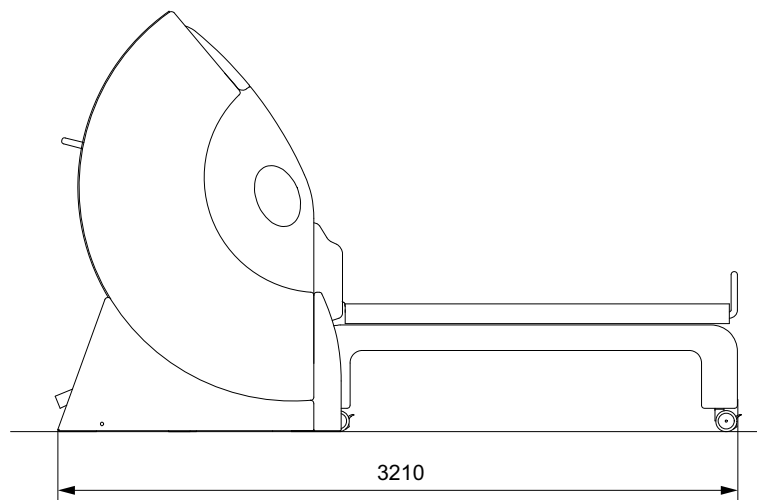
The probe unit in supine position with bed. Dimensions in millimeters.
